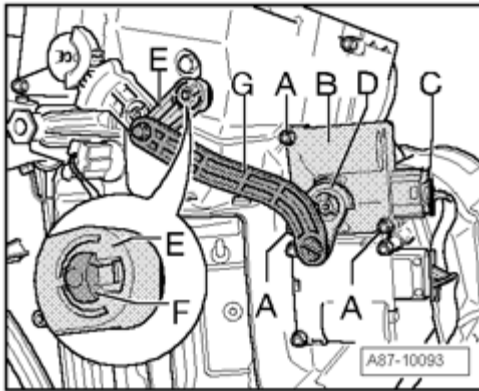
Identifying Connector, Fastener, Bolts, Control Motor, Connecting Rod, And Connecting Element
